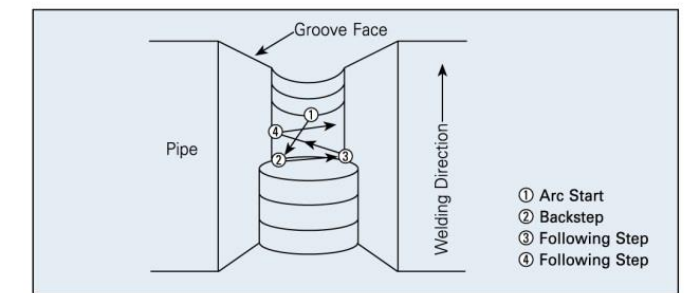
The Backstep Technique in Vertical-Up Position Welding of Pipes
